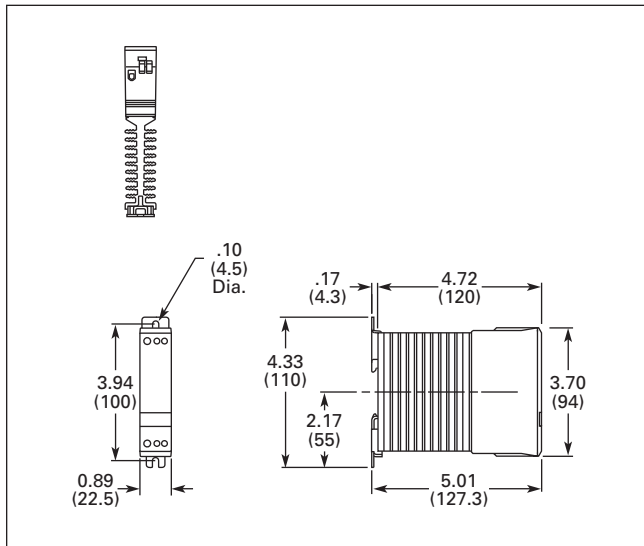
22.5 mm Frame — Approximate Dimensions in Inches (mm)
